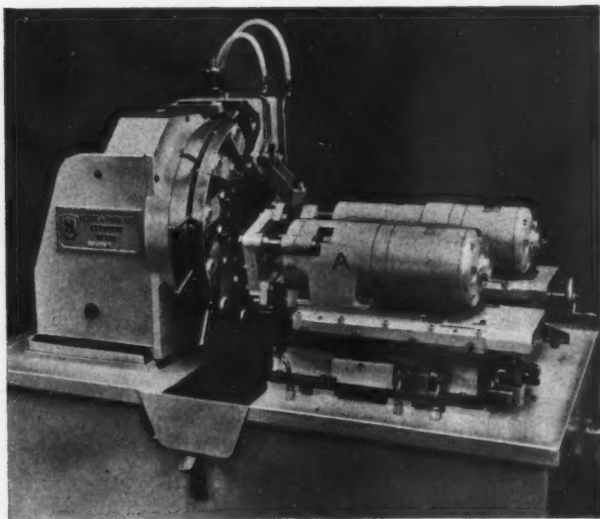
This Slack & Parr unit head machine is designed for drilling and tapping 4 B.A. by ⅜-in. deep holes in pistons for disc brakes. Interchangeable work fixtures are provided for handling parts of different sizes, and separate sets of cutter spindles on the unit heads can be brought into use for drilling and tapping holes at a centre distance of ⅜ or ⅝ in.
